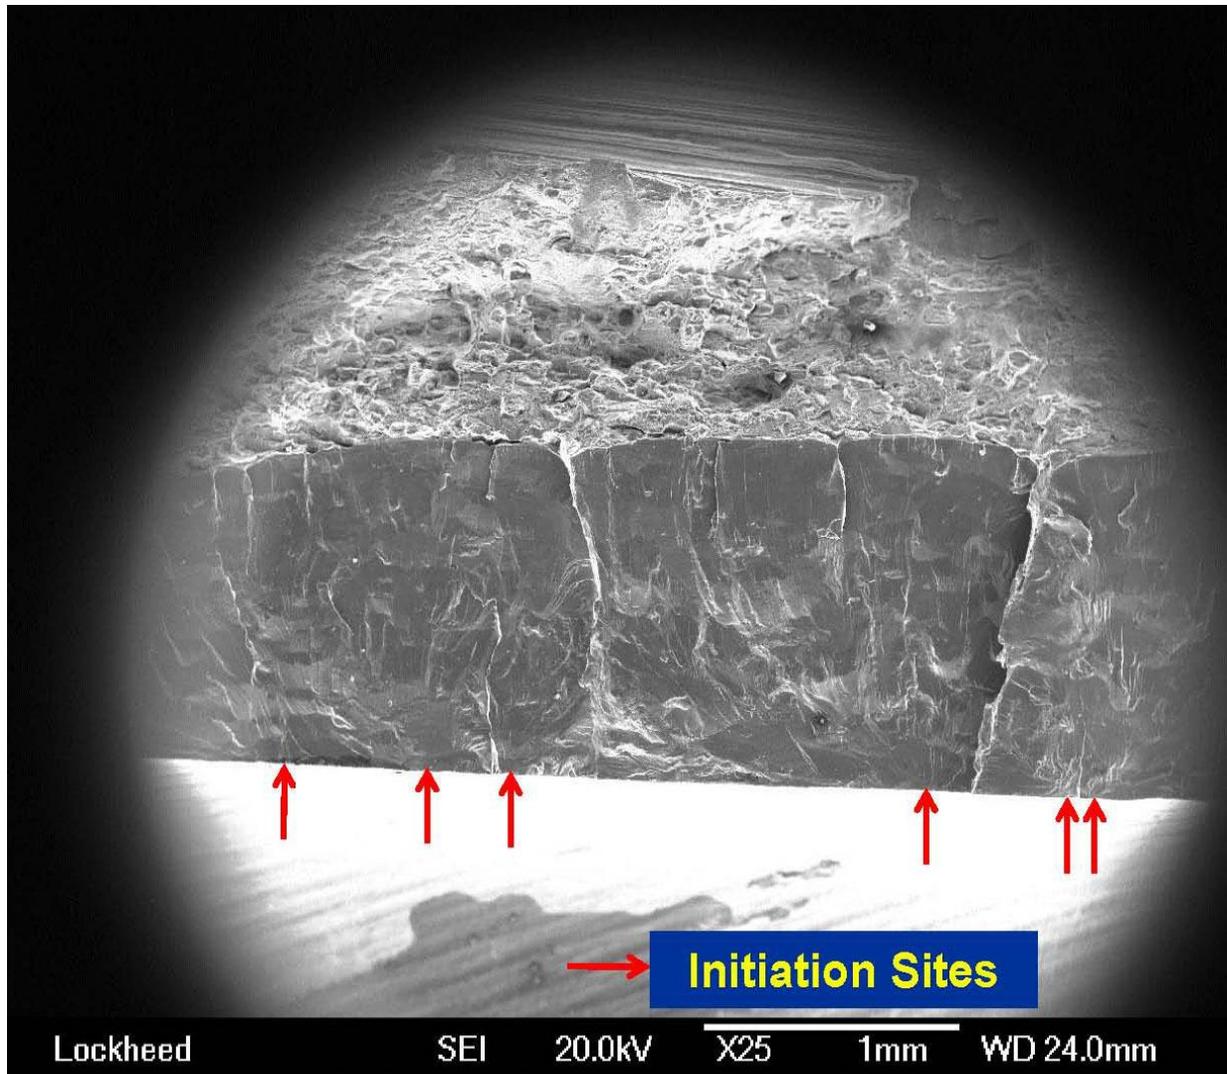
Test Fractography-Multiple Fatigue Crack Initiation Sites
